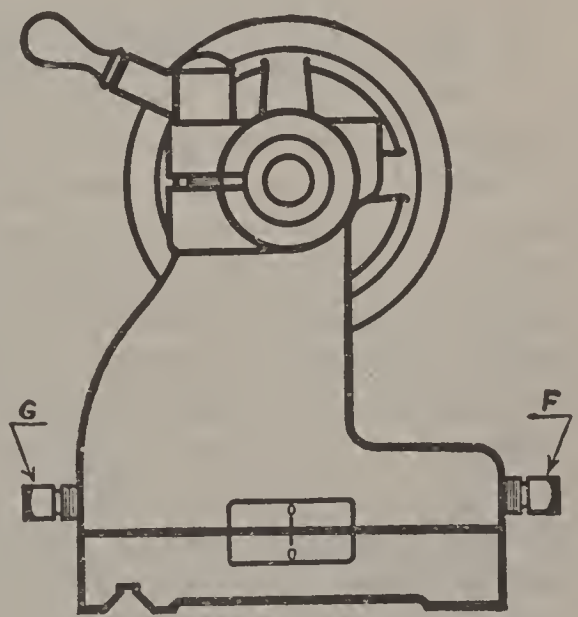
LATHE TAILSTOCK WITH ADJUSTING SCREWS
